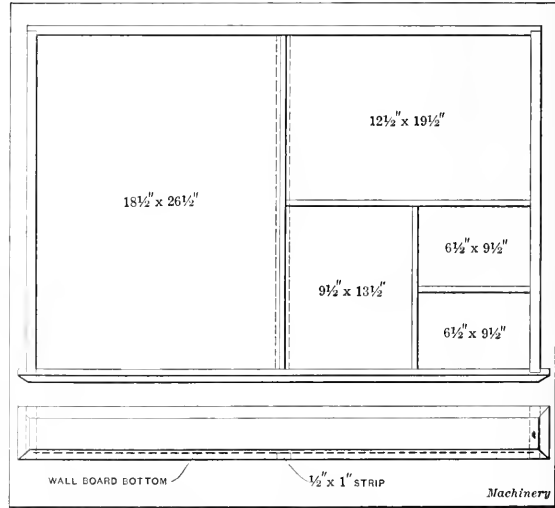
Design of Drawer equipped with Upsen Wall Board Bottom
